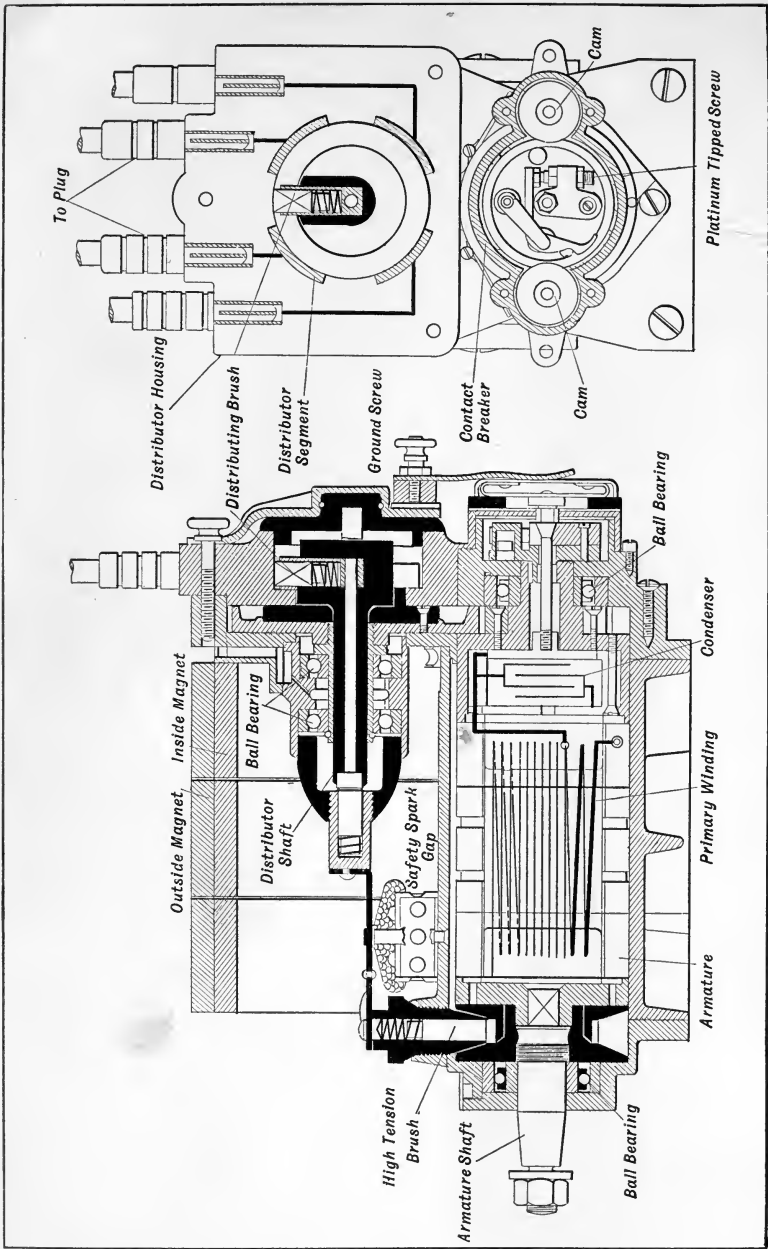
Side Sectional View of Bosch High-Tension Magneto Shows Disposition of Parts. End Elevation Depicts Arrangement of Interruptor and Distributor Mechanism.
